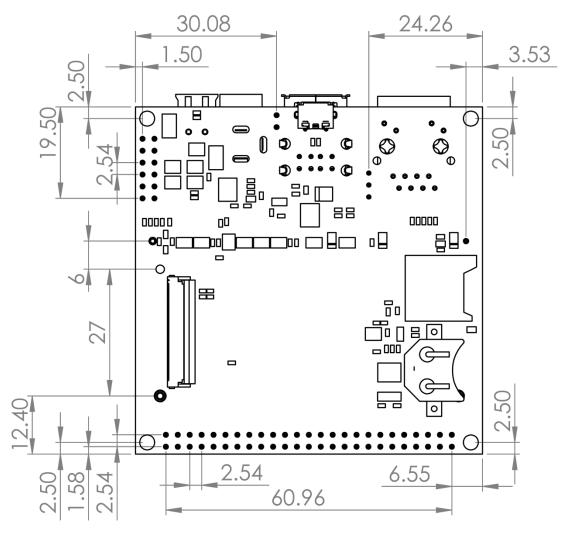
Viola Dimensions - Bottom Side, all dimensions are in millimetres (mm)
